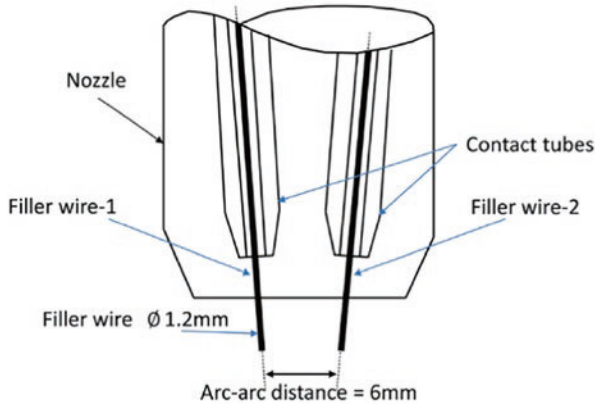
Schematic of twin-wire welding torch for the WBAM system [34]
